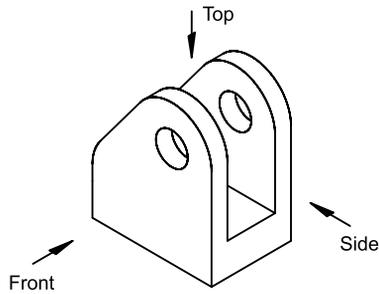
In this exercise we will draw the top view, front view and side view of this object.
